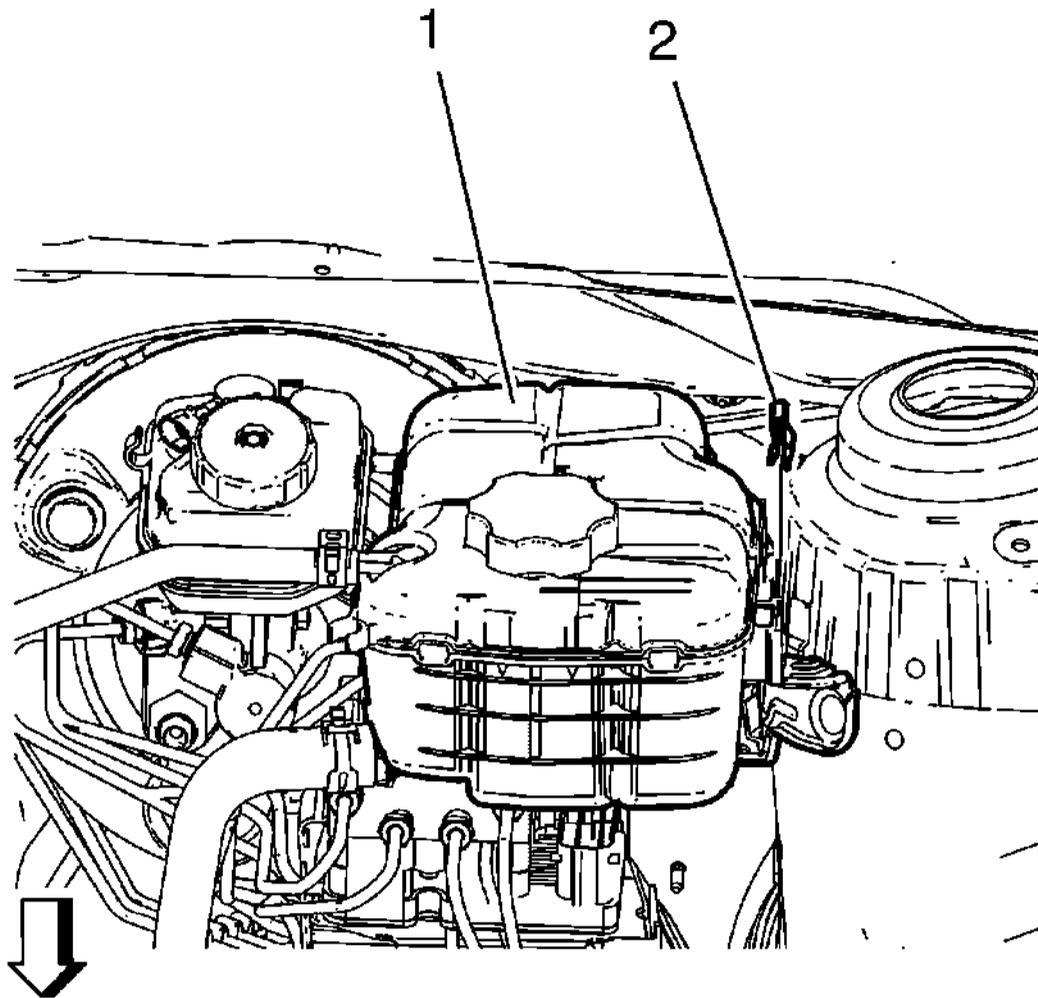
View Of Radiator Surge Tank And Radiator Surge Tank Clip
